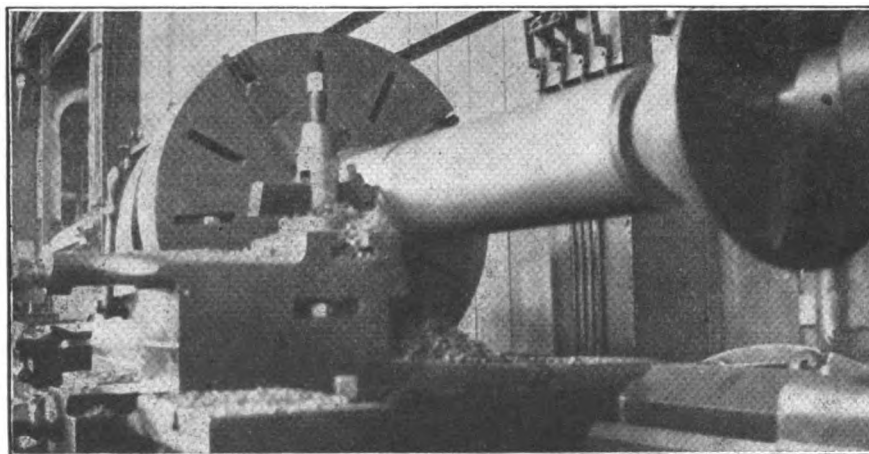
THE TEST CYLINDER SET UP IN LATHE
